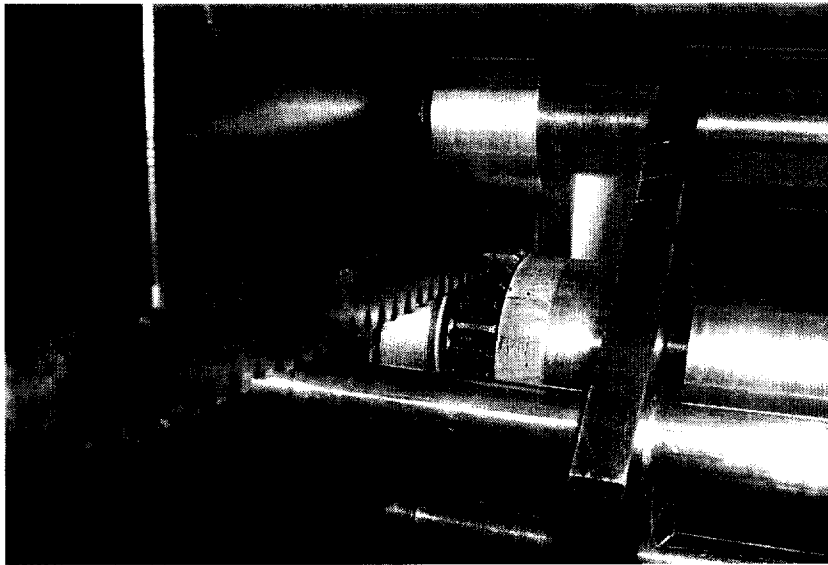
Photo of rotating extrusion die with rack gear and pinion gear
